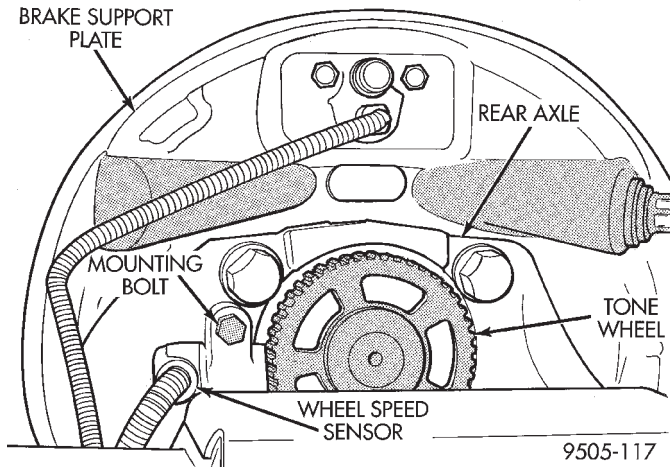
Rear Wheel Speed Sensor Attaching Bolt
